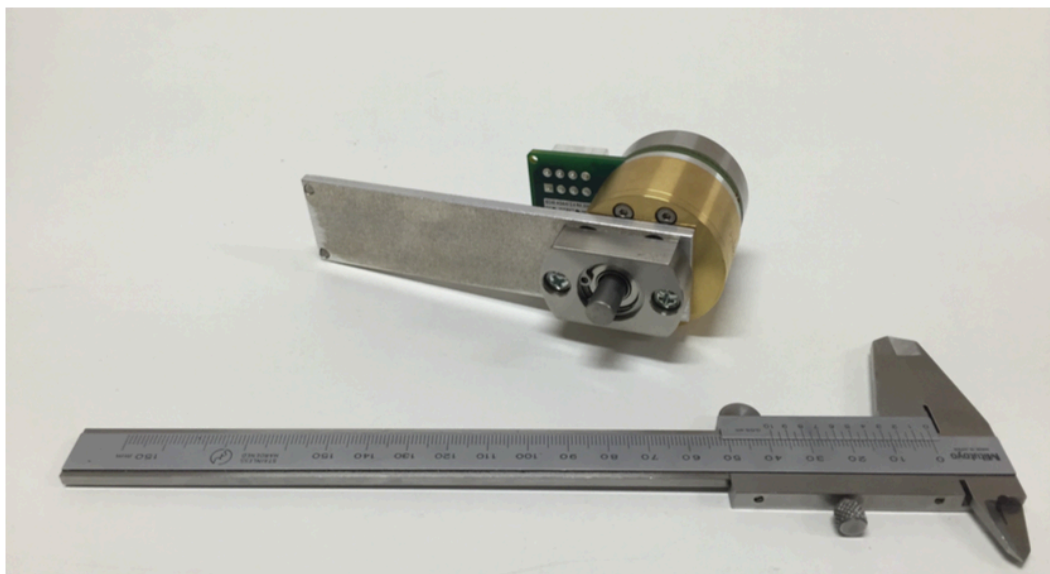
Joint 5* assembly, mounted on *link 4*, with motor installed.
